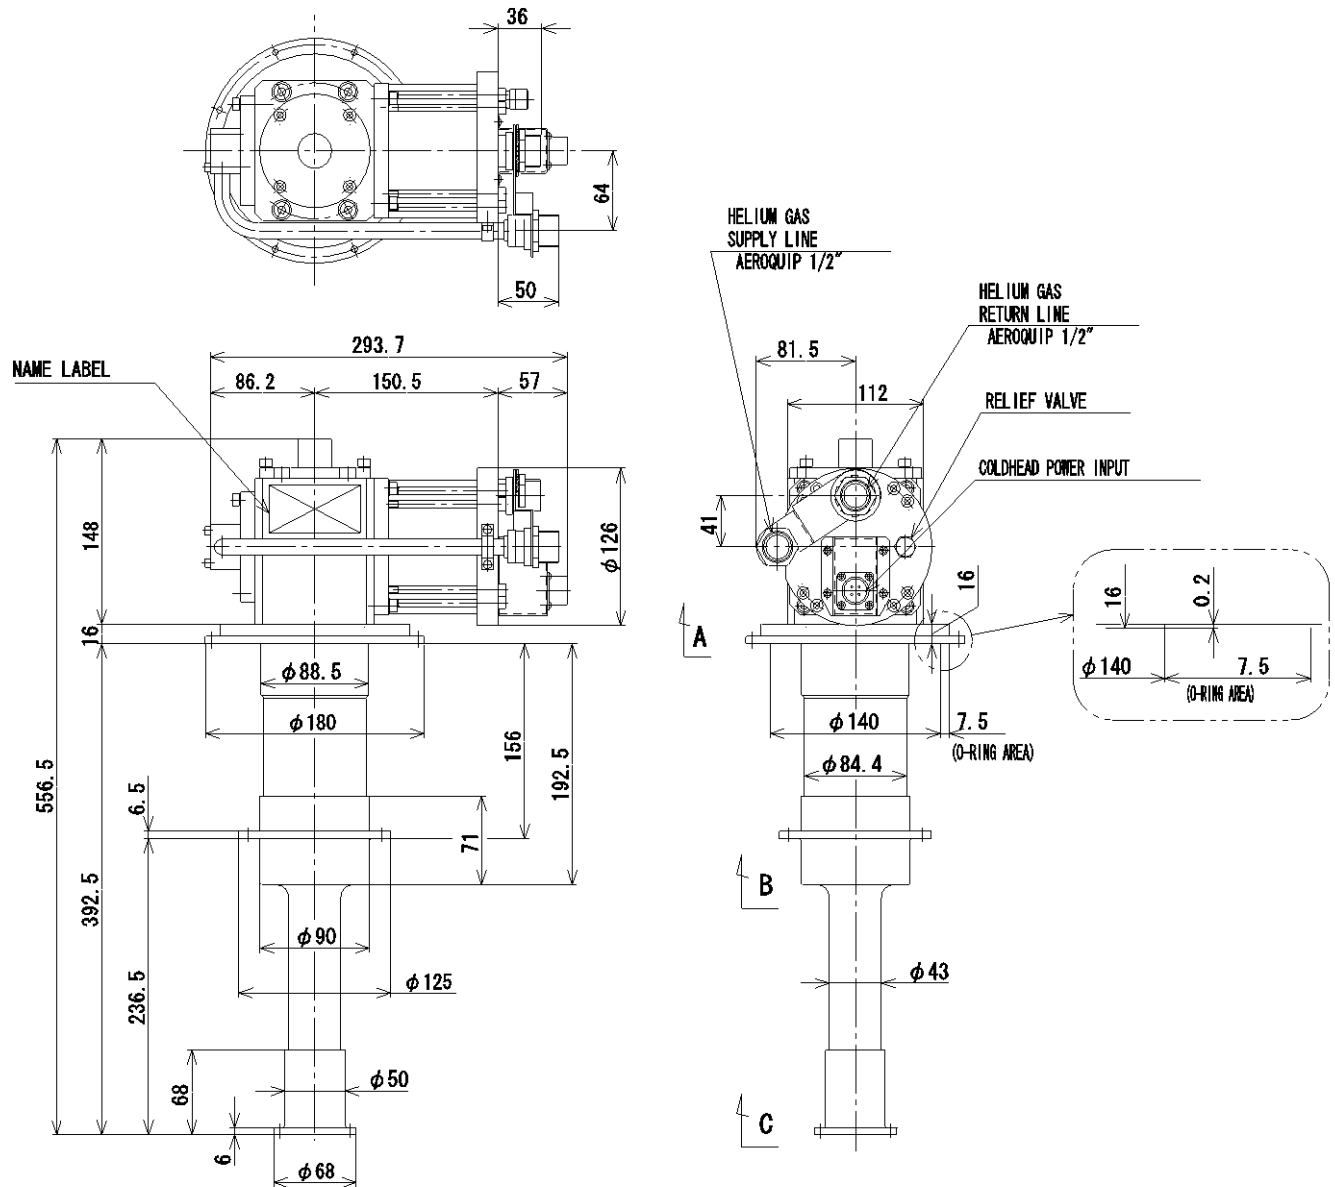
OUTLINE VIEW OF COLD HEAD MODEL RDK-415D
